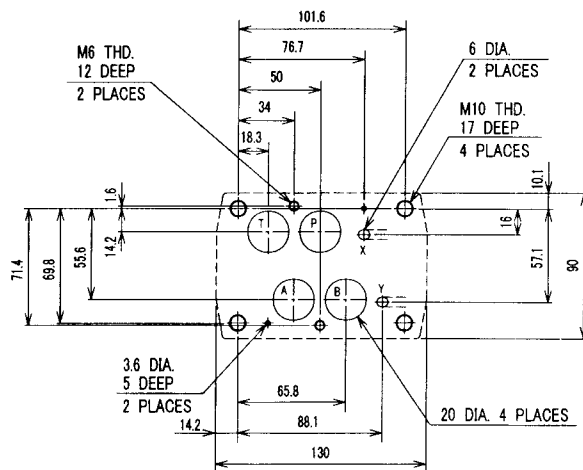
Dimensions of Valve Mounting Surface for ELDFHG-04-280-※-※-※-10
